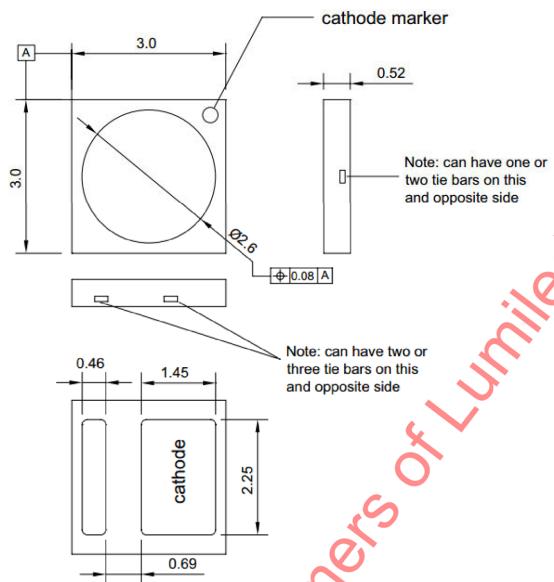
Mechanical Drawing for LUXEON 3030 2D. All dimensions are in millimeters.
